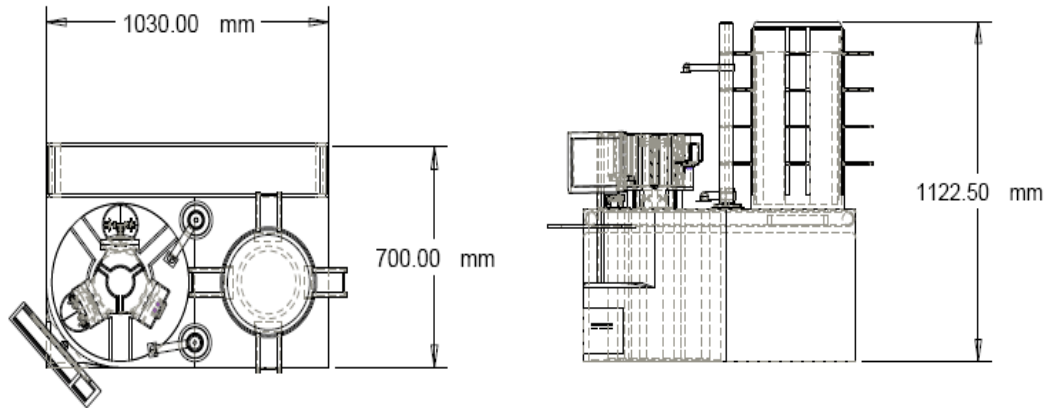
Footprint and dimensions of a Re-configurable machine cell.
